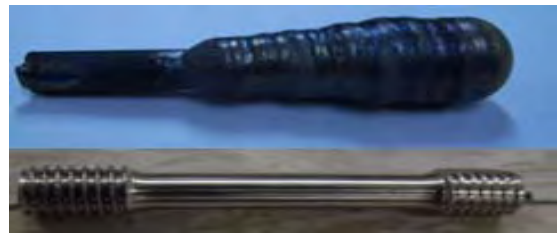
Build up specimen by GTAW(Upper) and machined specimen for hot tensile test(Lower)
